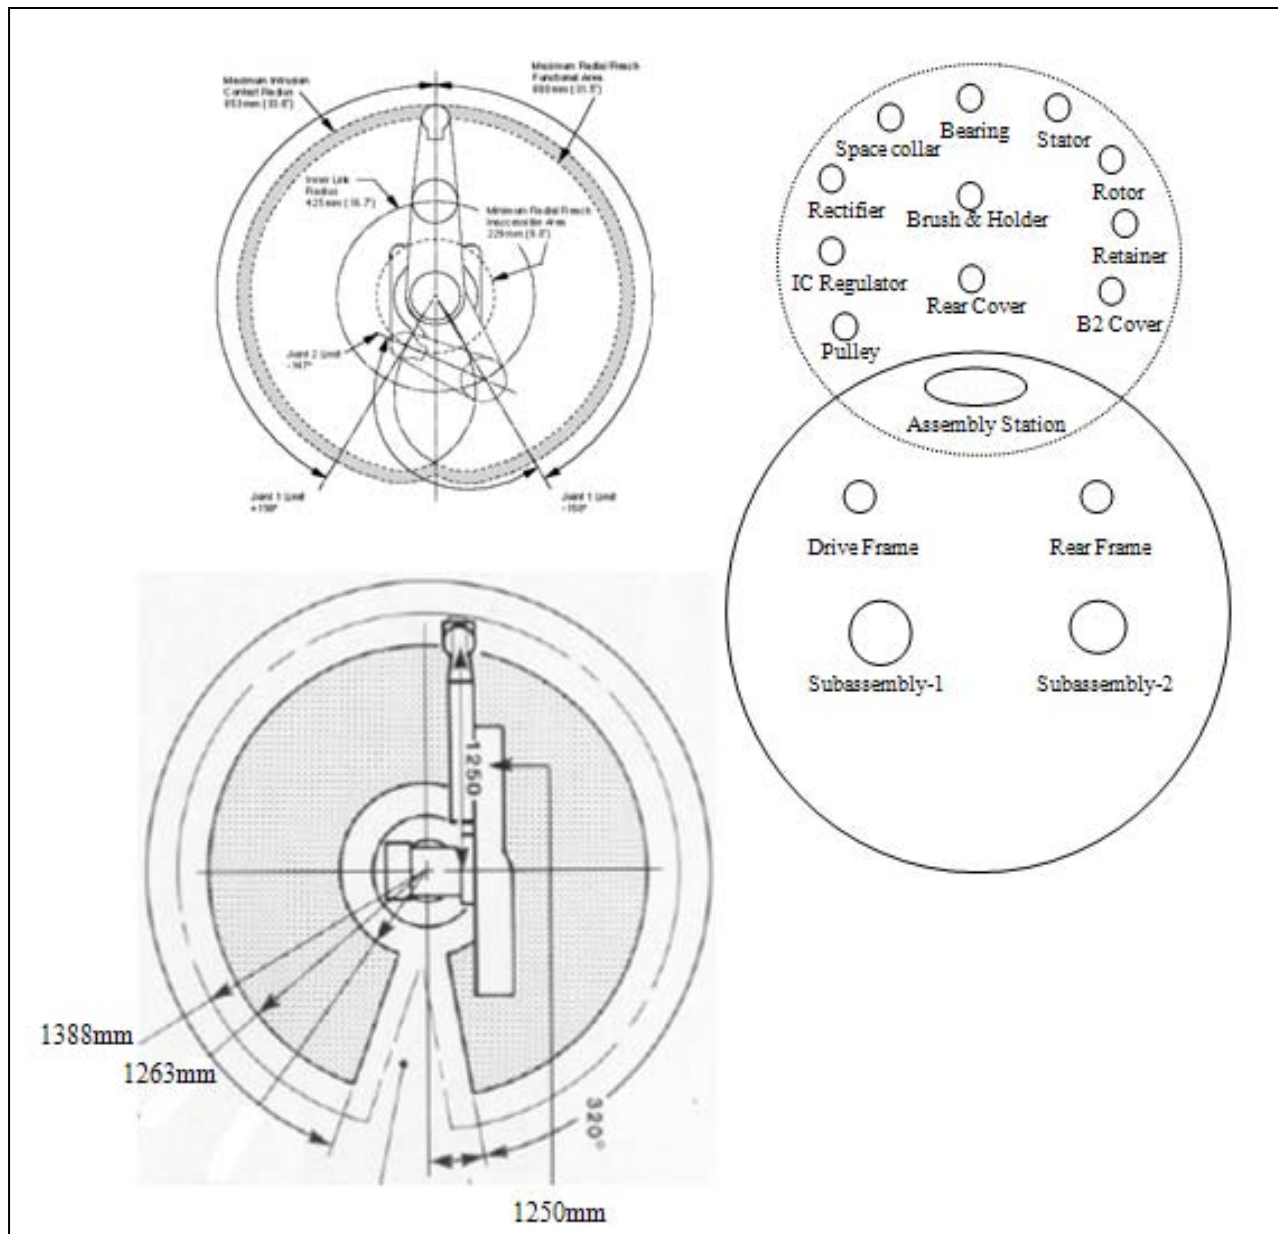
Workcell-3 for car alternator assembly with Adept-one and Puma-762 Robot
